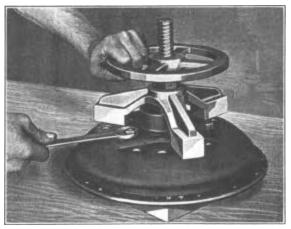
Disassembling Clutch—J-298-H Clutch Fixture
